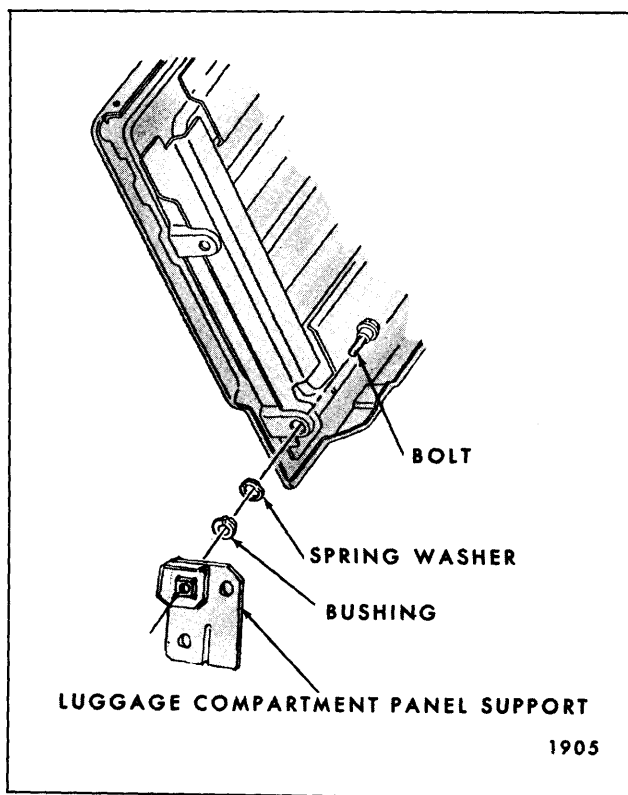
Luggage Compartment Panel Attachment to Body
